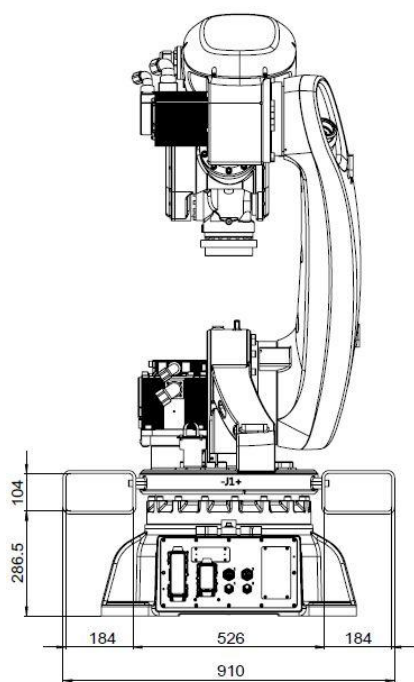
Operating Machine Dimensions for RX3-A650-2700 During Handling
